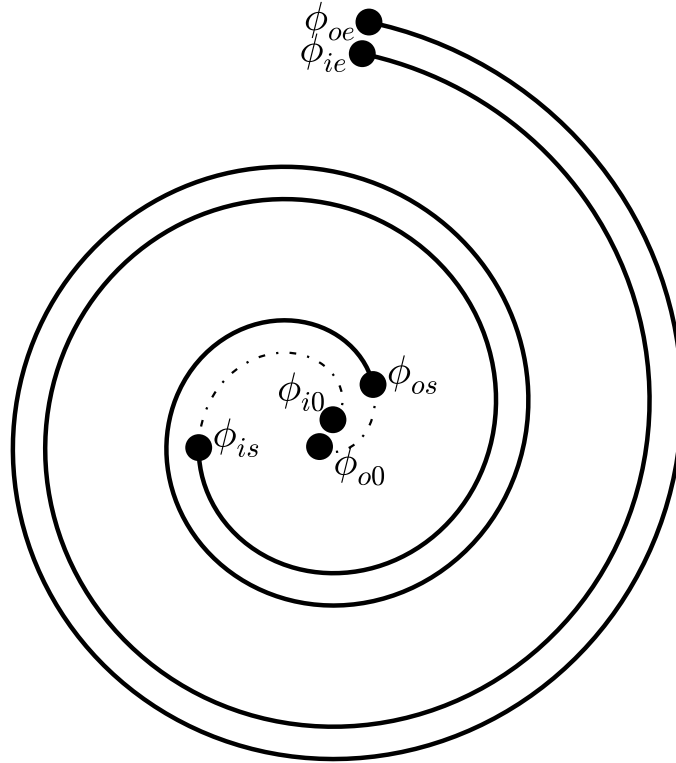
Involute forming the fixed scroll and angle definitions.
